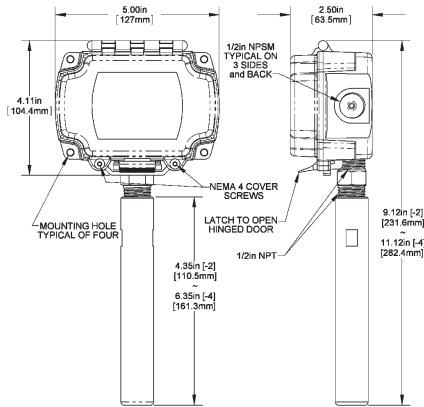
2" & 4" Thermbuffer in a BAPI-Box (BB) Enclosure
